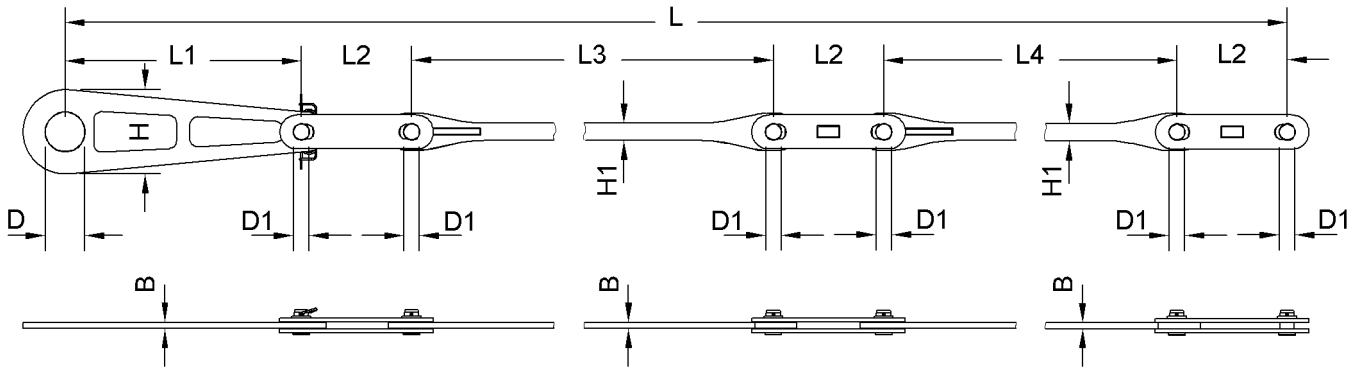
Dimensions of jib pendant strap (A-frame 2 to 1507 jib head section)
